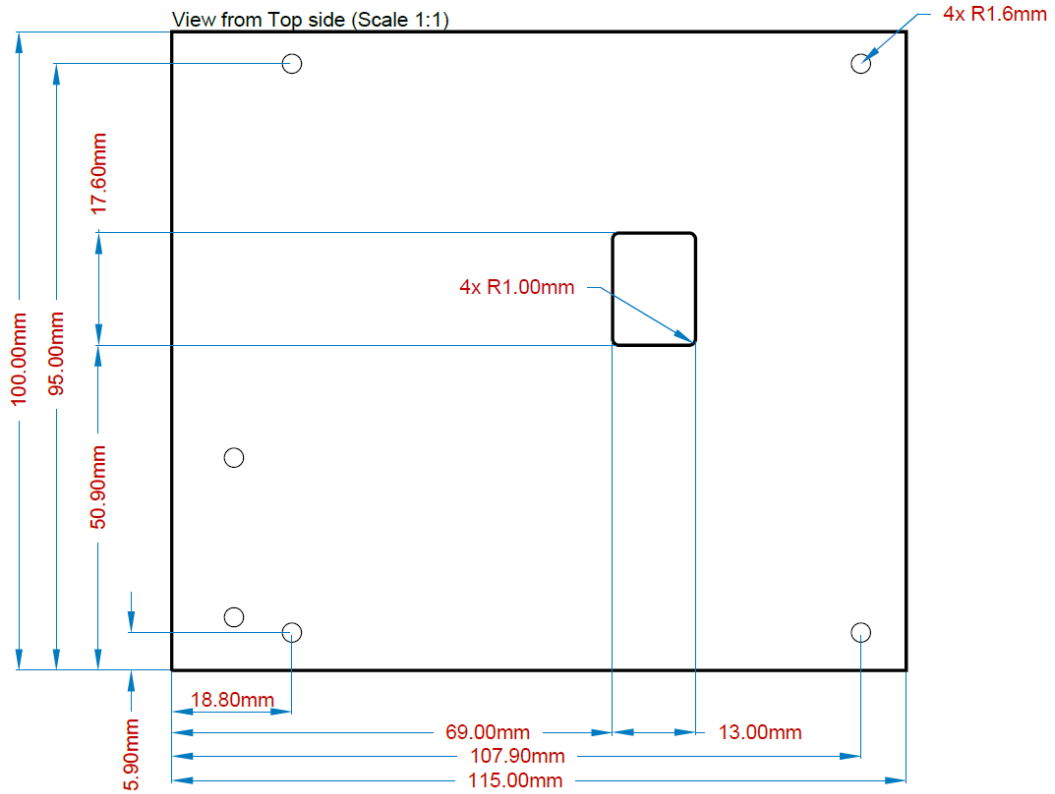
Mechanical Dimensions CMS / CME EVB (top view)
